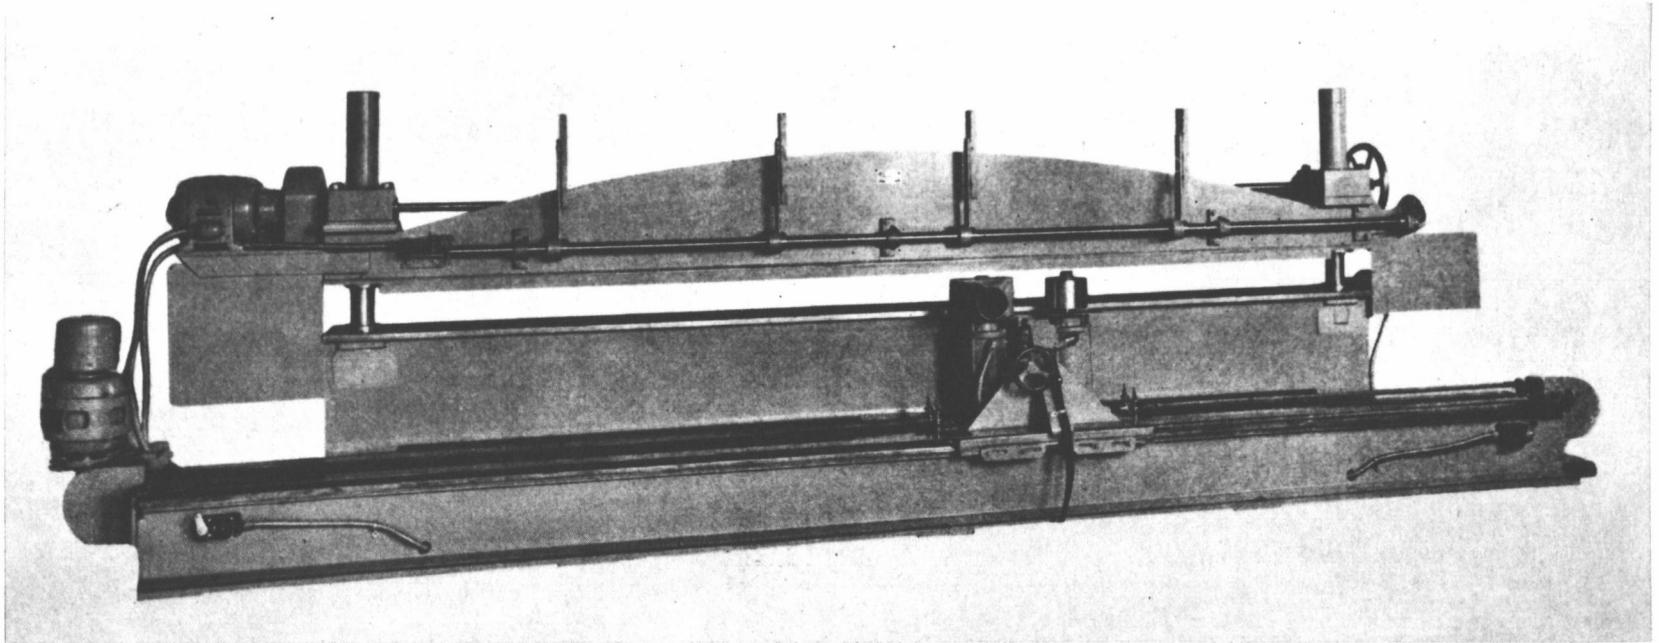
Fig. VI-Traveling Head Veneer Jointer,Cutter Head Side
